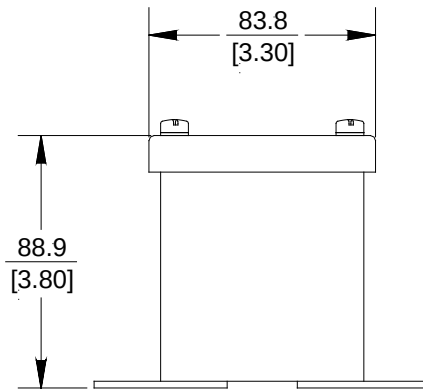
end View of Valve Position Transducer with Weatherproof Housing Option
